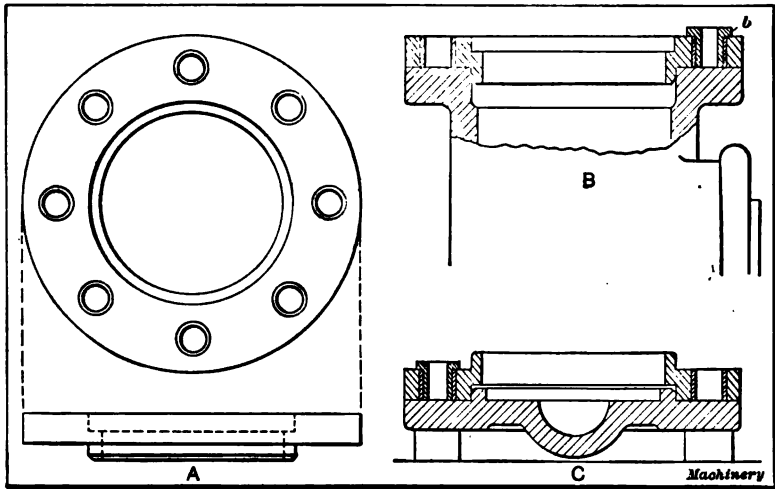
Jig for Cylinder Flange and Head, and its Application
